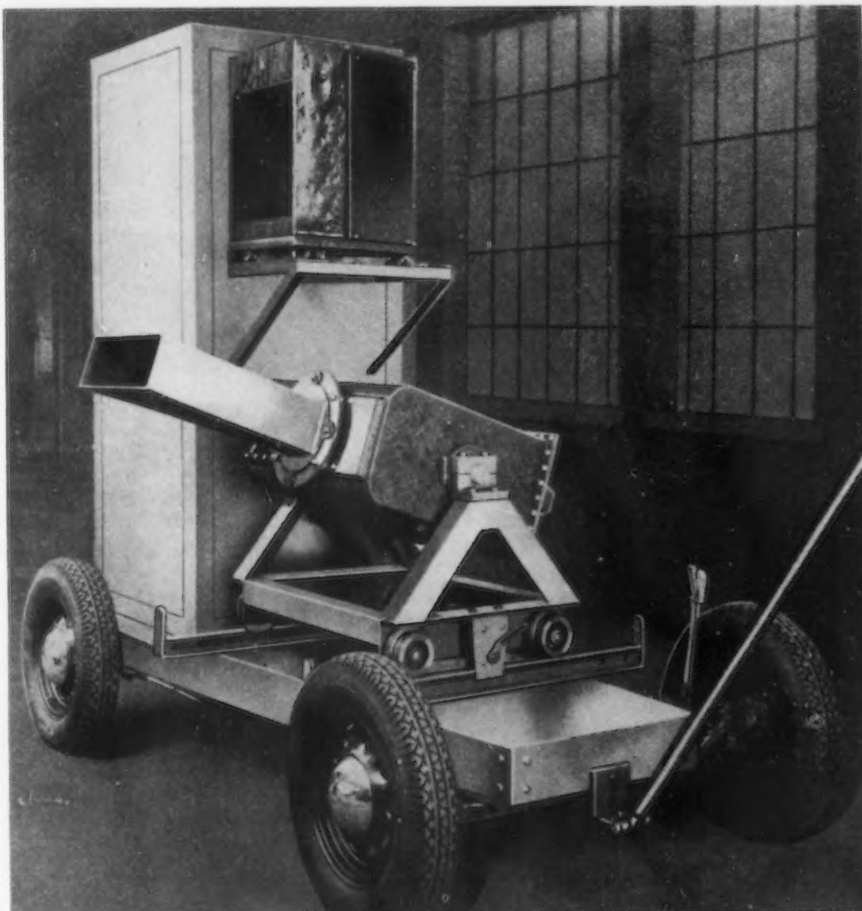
A 220-kv. portable X-ray unit for inspection of industrial materials. Photo courtesy of General Electric X-Ray Corp.
